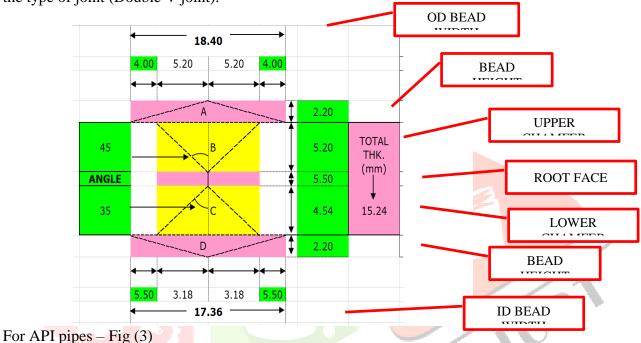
For double V joints, the welding terminology includes specific joints for SAW, such as ID and OD welding bead height, upper and lower bevel, and root face with bevel angles.
